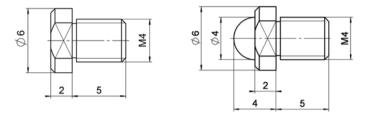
Flat end piece (left) and spherical end piece (right), dimensions in mm
